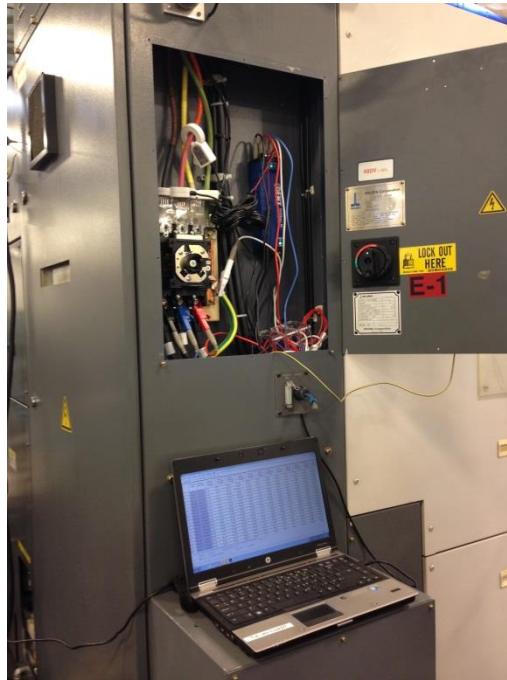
Power meter installed in OKUMA "Twin Star" CNC machine
